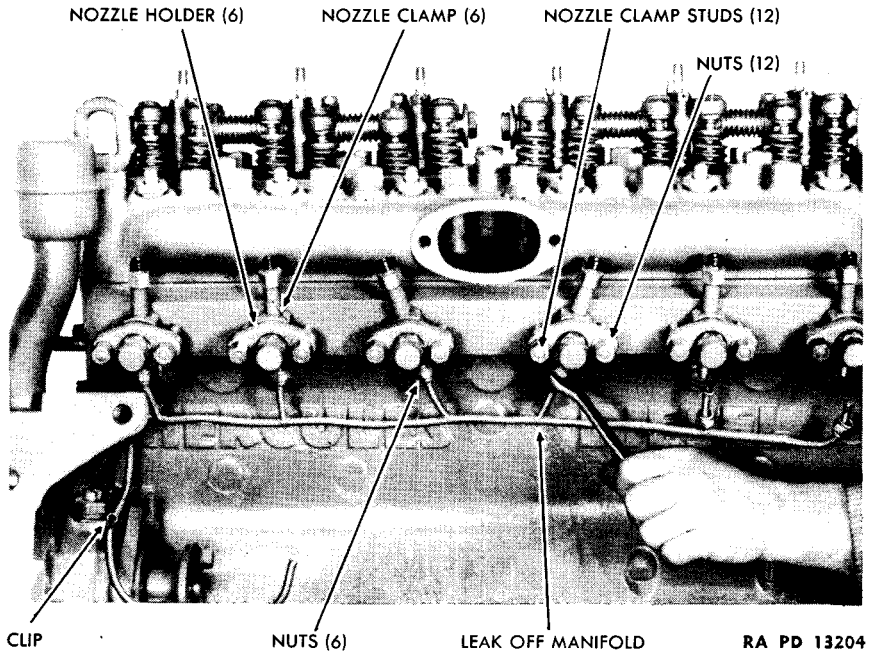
Fuel Nozzle and Holder Removal - (Hercules Diesel)
